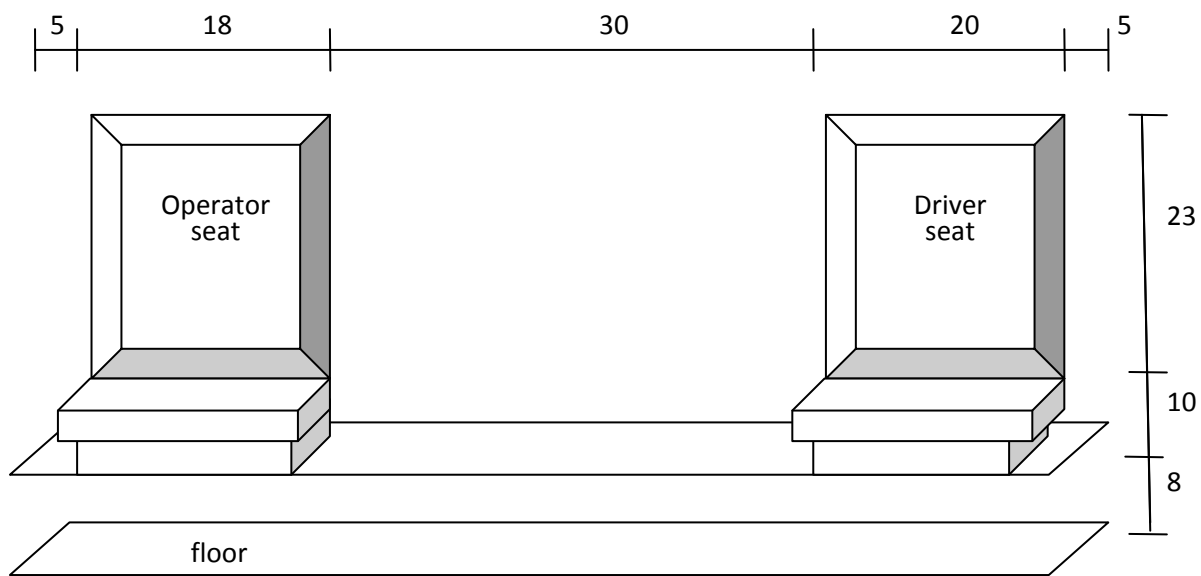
TPAD Big Cab Dimensions Measurement (Units in Inches)
